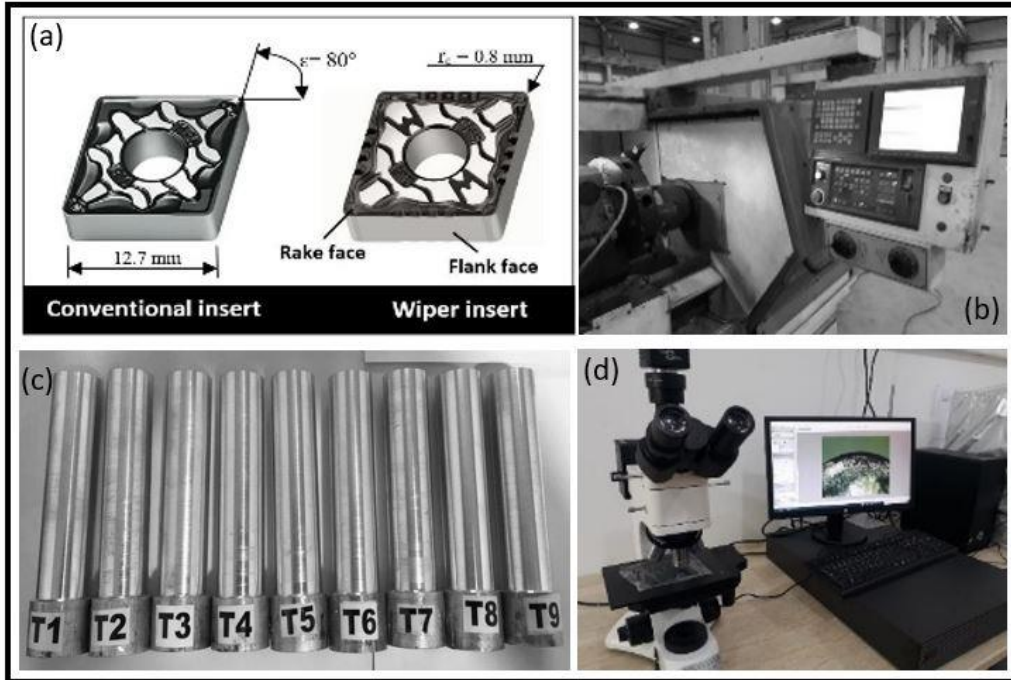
Experimental set-up: (a) cutting tools; (b) CNC Pinacho Mustang 250 machine; (c) 6060 aluminium machined bars; (d) FL8000 upright metallurgical optical microscope
